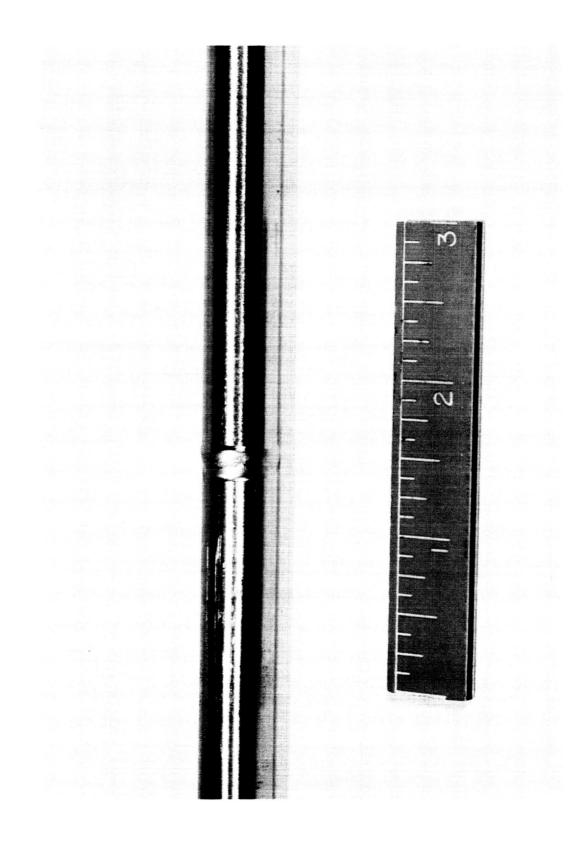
Weld Between Cb-1Zr Crucible and Mo-2Ti Collector Tube (View Normal to Axis).
